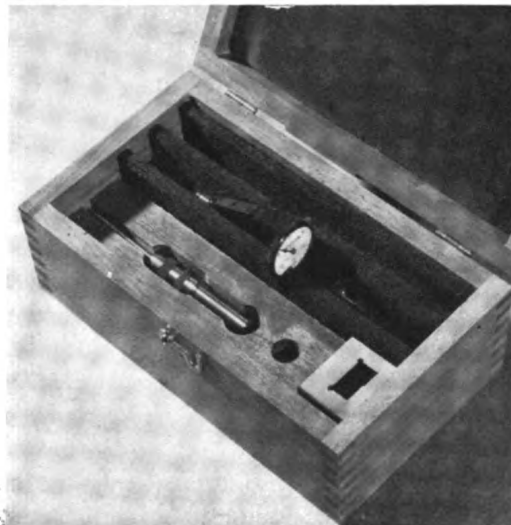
This indicator set consists of an indicator (horizontal or vertical dial, .001" or .0001" graduations), a jointed indicator holder, a line-finder and an edge-finder.
